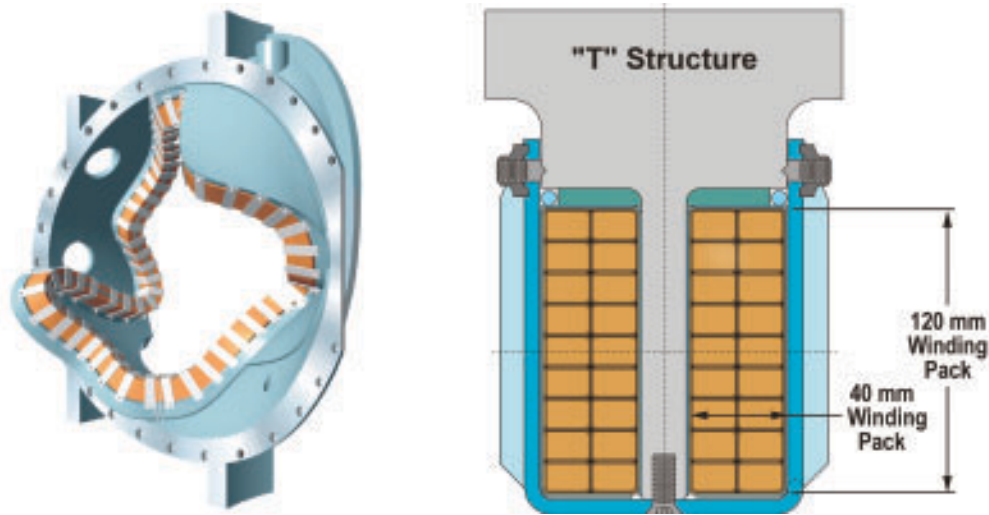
Modular coils. (a) Completed coil wound on winding form. (b) Cross section of the winding pack.
